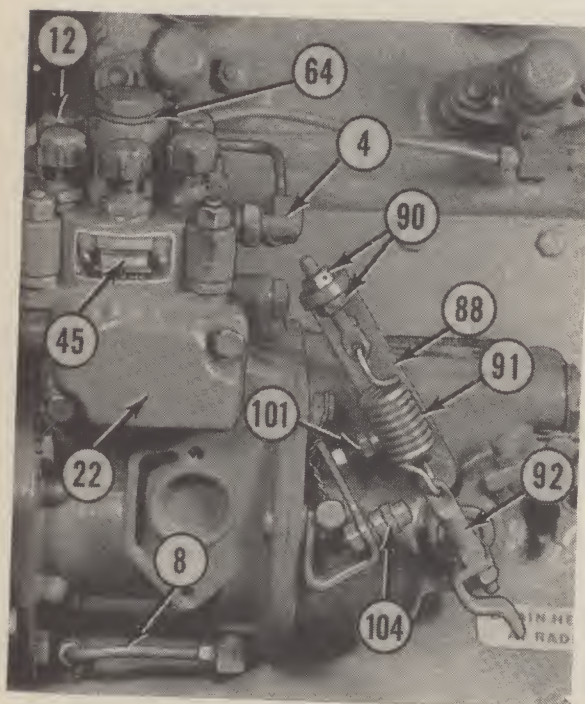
View of Bosch type PSB injection pump showing nuts (90) which control tension of governor spring (91) to vary the high idle engine speed.
